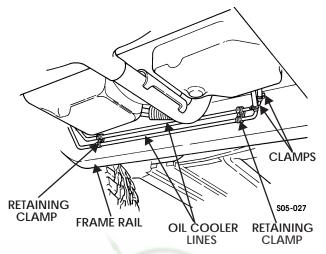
Check Valve and Transmission Oil Cooler Lines
